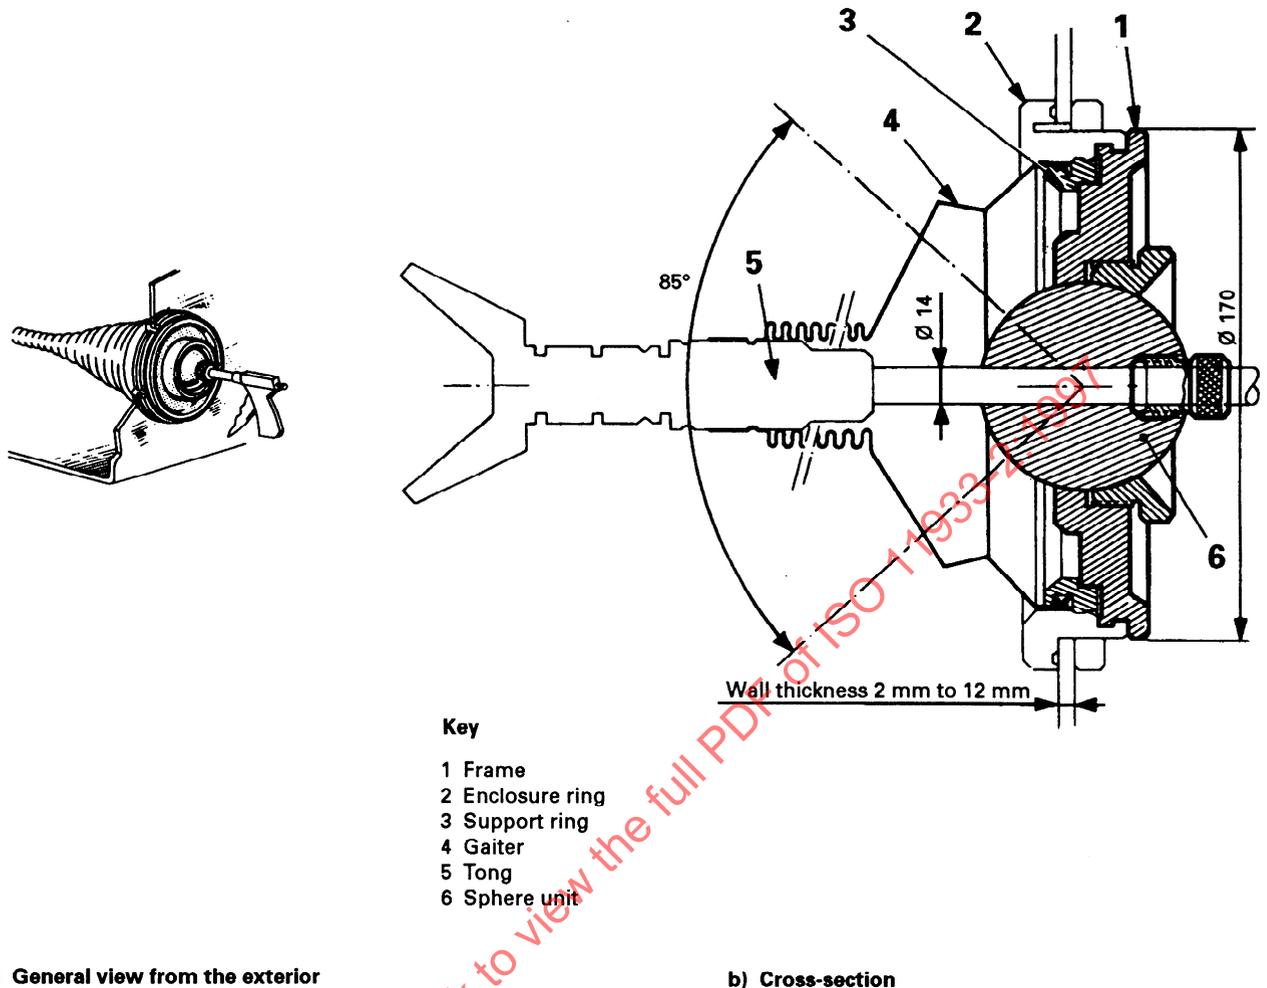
Mounting of remote-handling tongs directly on containment enclosure walls
